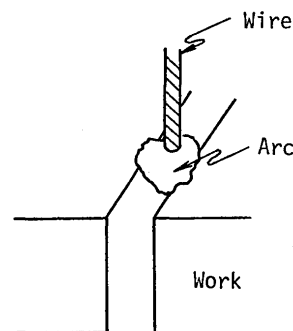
An illustration of the arc welding process progressing part.
